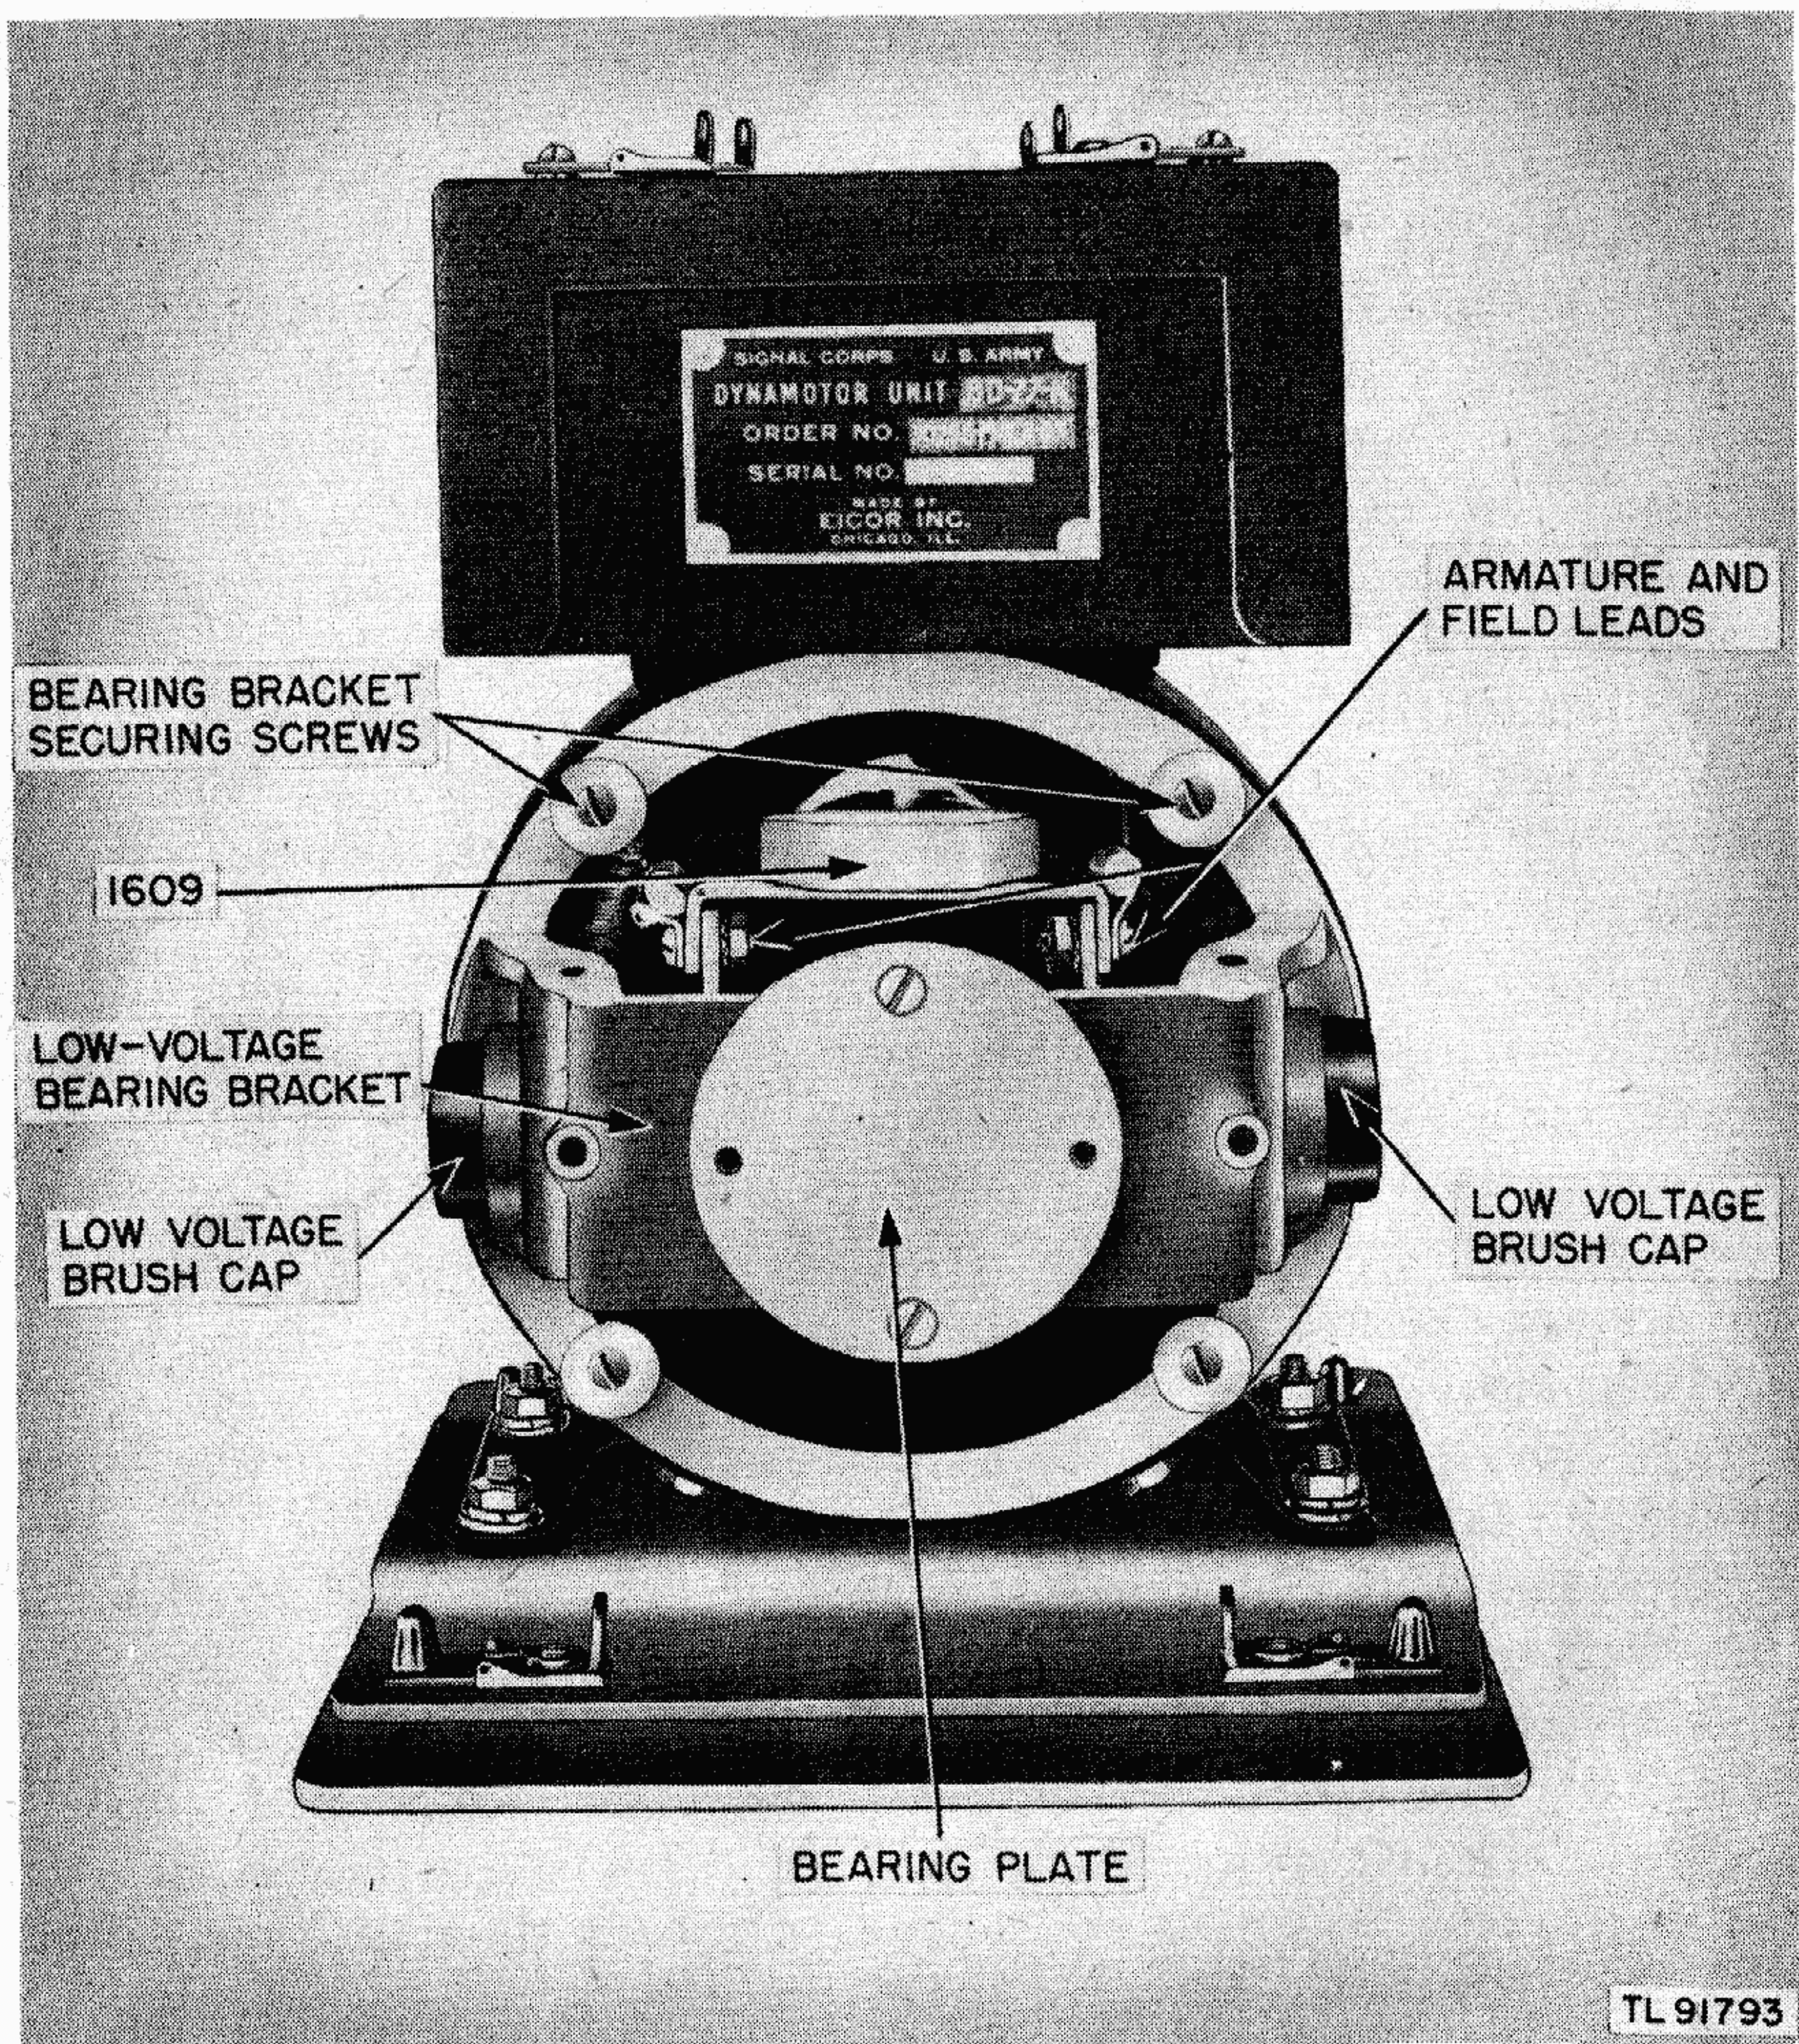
Dynamotor Units BD-77-K and -KM, Low-voltage End, Dynamotor End Cover Removed.
